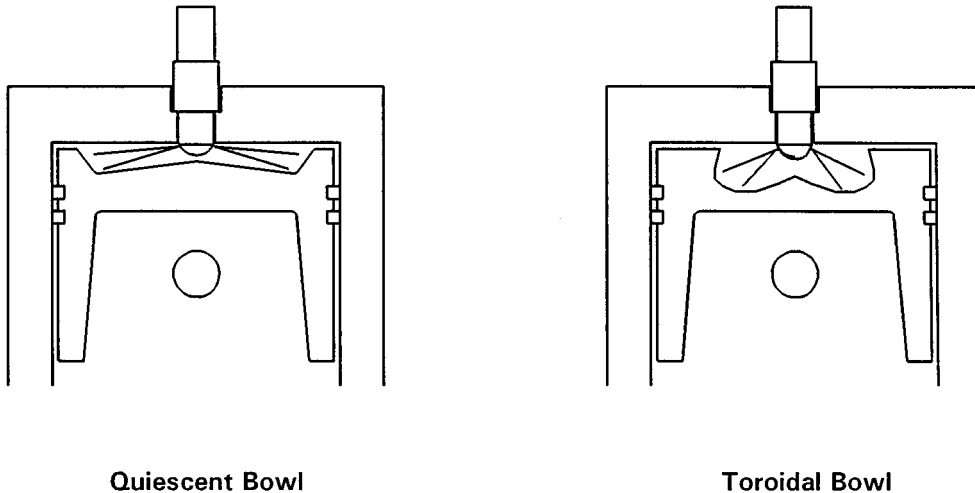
Examples of DI diesel combustion chamber design.
